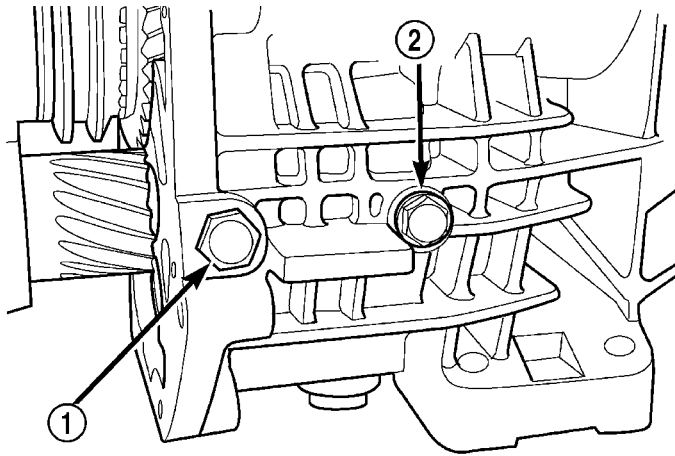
REVERSE IDLER SHAFT/SUPPORT BOLT
